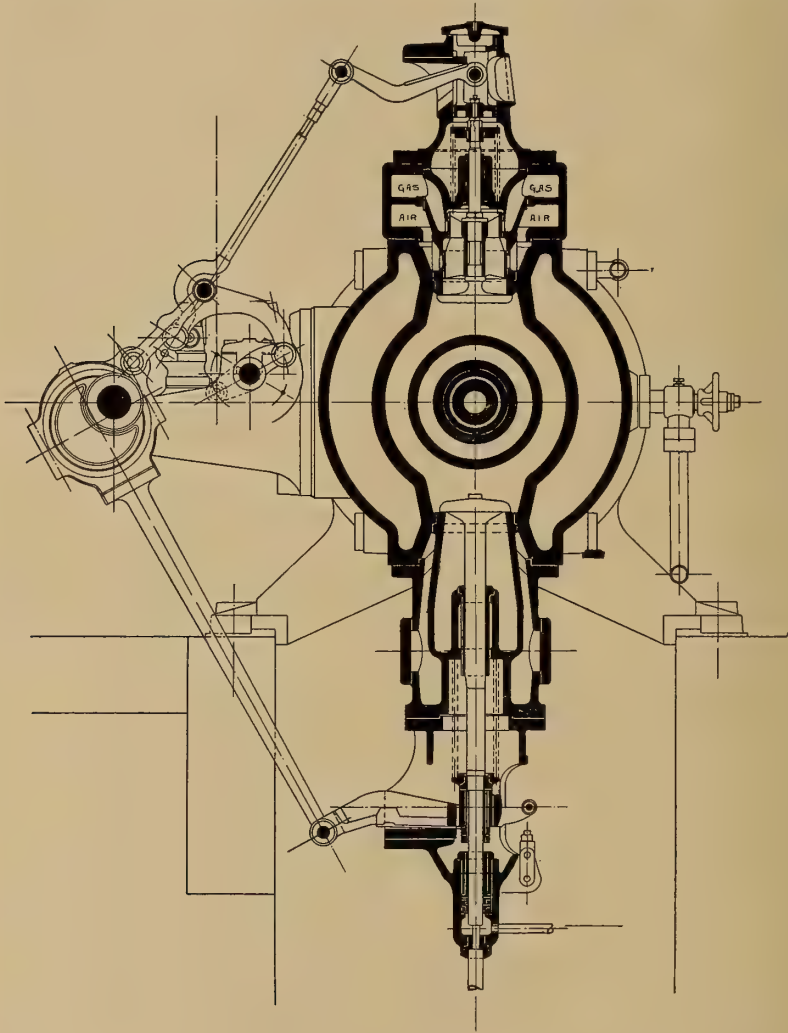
CROSS-SECTION OF CYLINDER AND VALVE GEAR OF THE SWISS LOCOMOTIVE & MACHINE COMPANY'S ENGINE
